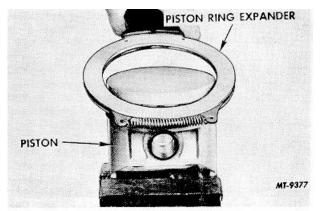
Installing Piston Ring Using SE-1149 Piston Ring Expander Tool
